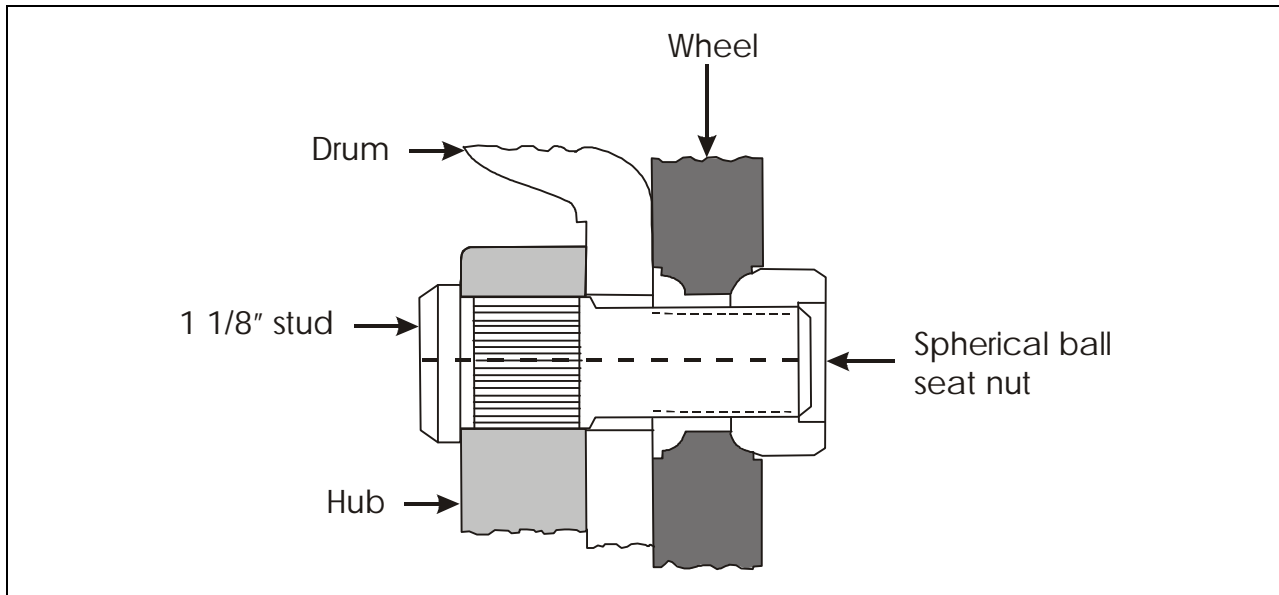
SINGLE WHEEL, STUD LOCATED, BALL SEAT MOUNTING
